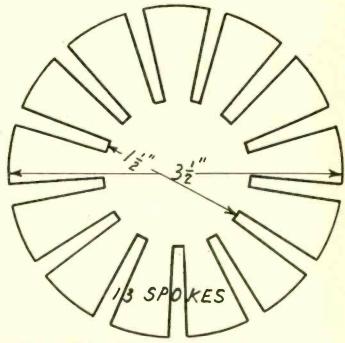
Former to be used for winding coils for the Ultradyne circuit. This illustration may be used as a cutting template.
